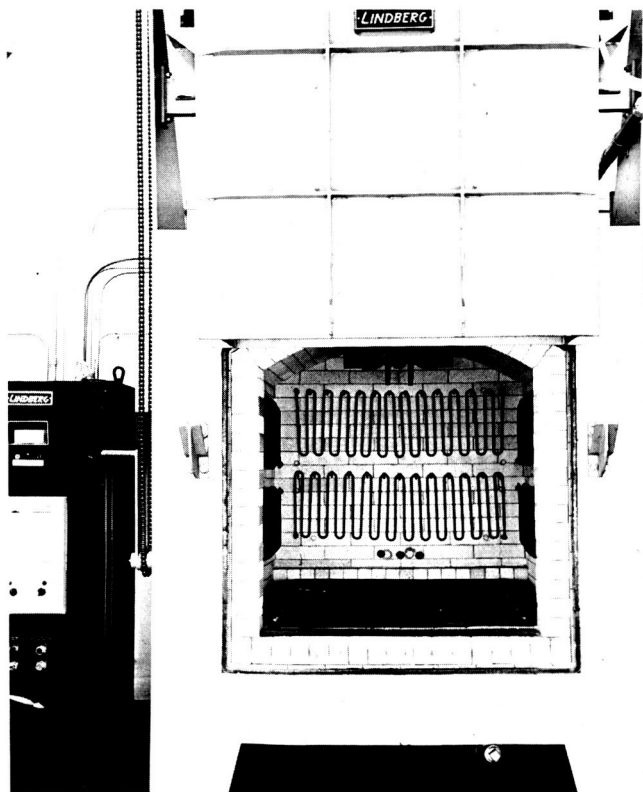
Heat-Treating Furnace Used to Process Explosively Formed Components
